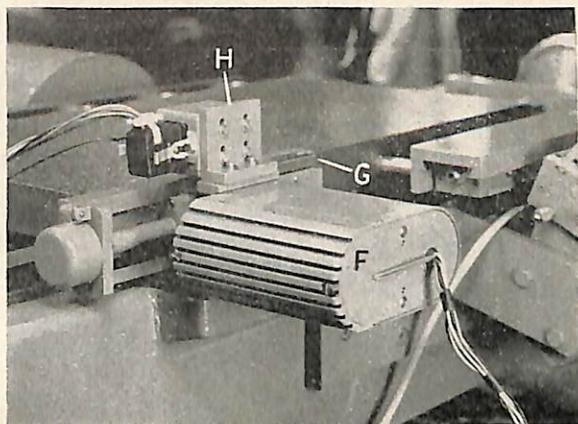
The Photo-electric Microscope Used for Controlling the Machining Dimension
